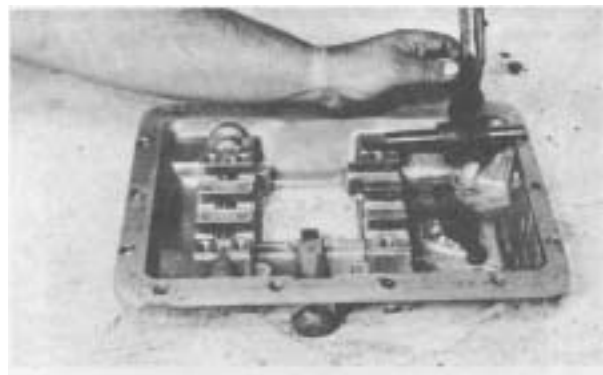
Install 1st & reverse shift fork and rail assembly in control housing. Install shift rail lock pin to position rail in control housing.
